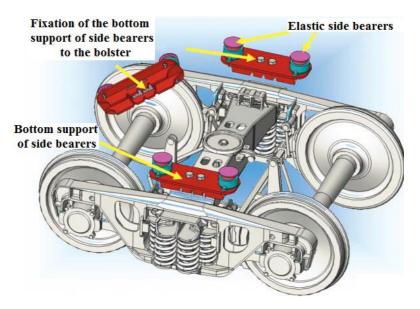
Installation of side bearings and elastic elements on the bogie mod. 18-100
